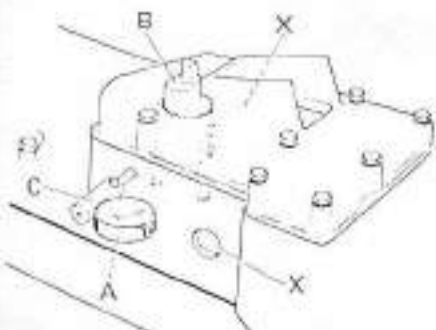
Drawing showing adapter (C) for pressure gage (A) installed through hole in cover into valve in place of plug (12—Fig. 120). Band adjustment holes are at (X) and valve protrudes at (B). All openings in cover are covered for normal operation.
